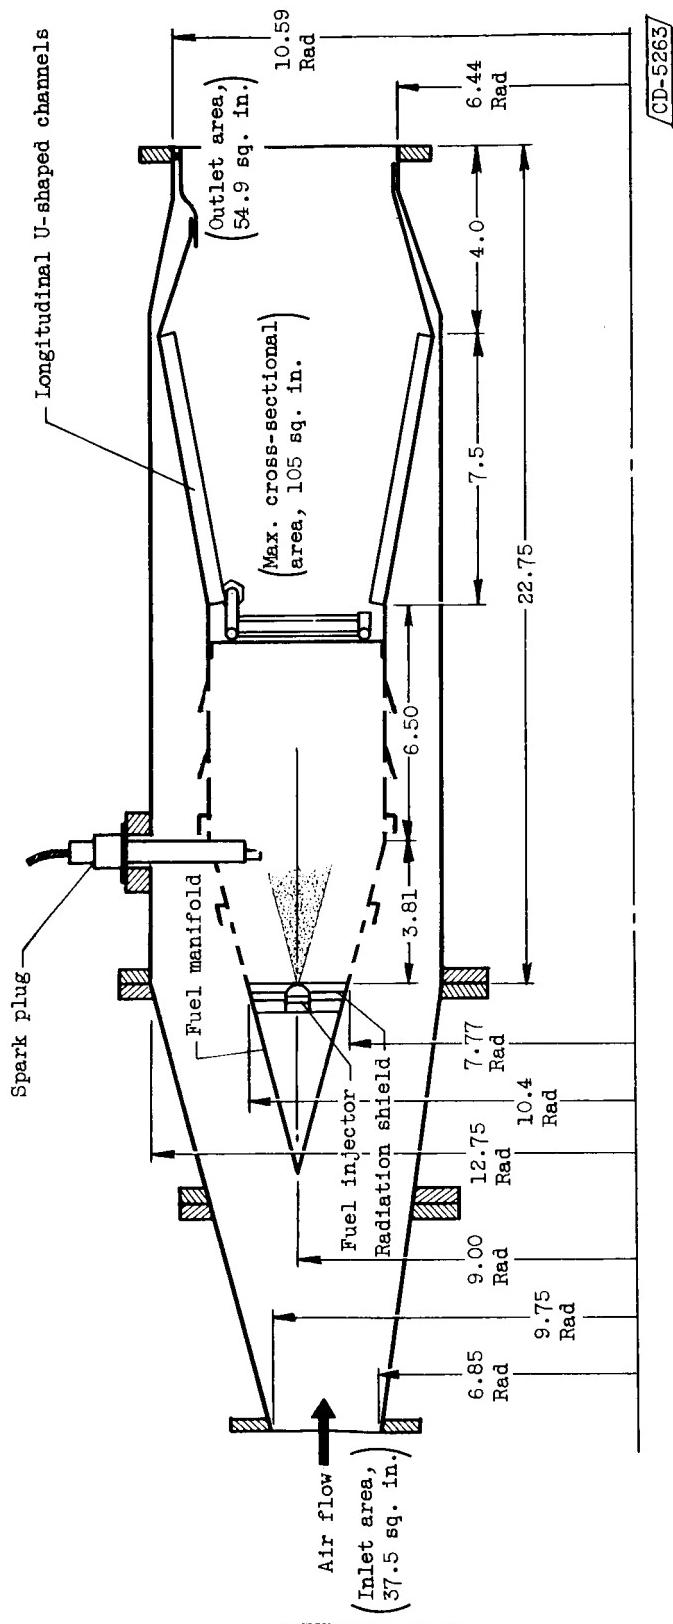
Longitudinal cross-sectional view of combustor and housing. (Dimensions are in inches.)
